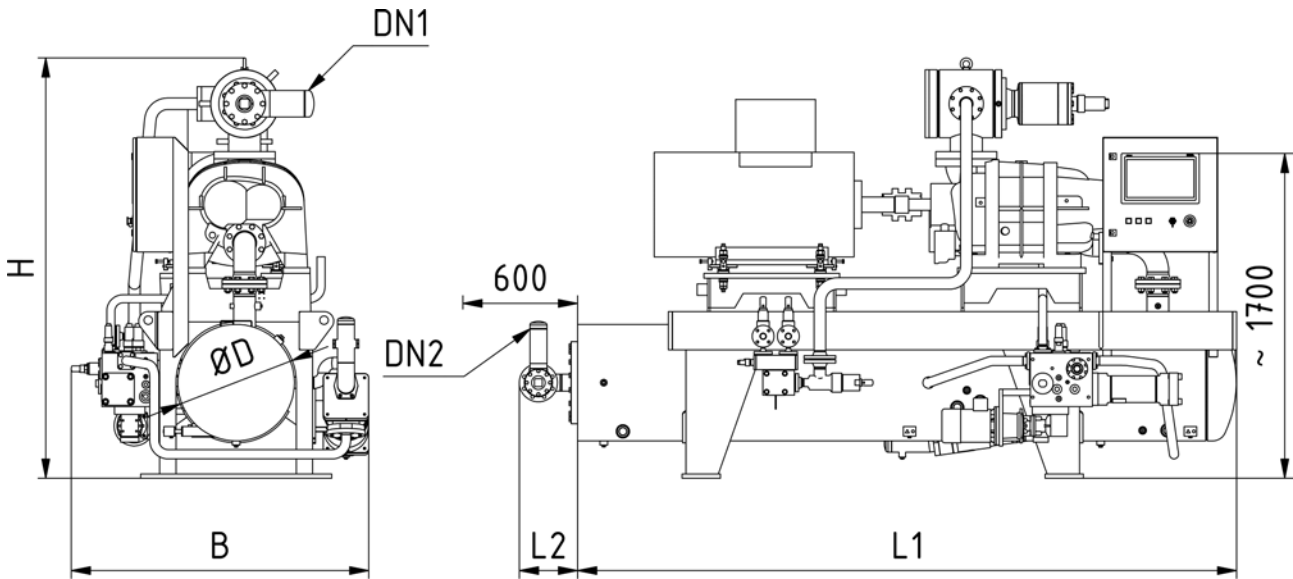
GEA Grasso SP1 compressor frame size Z, XA
